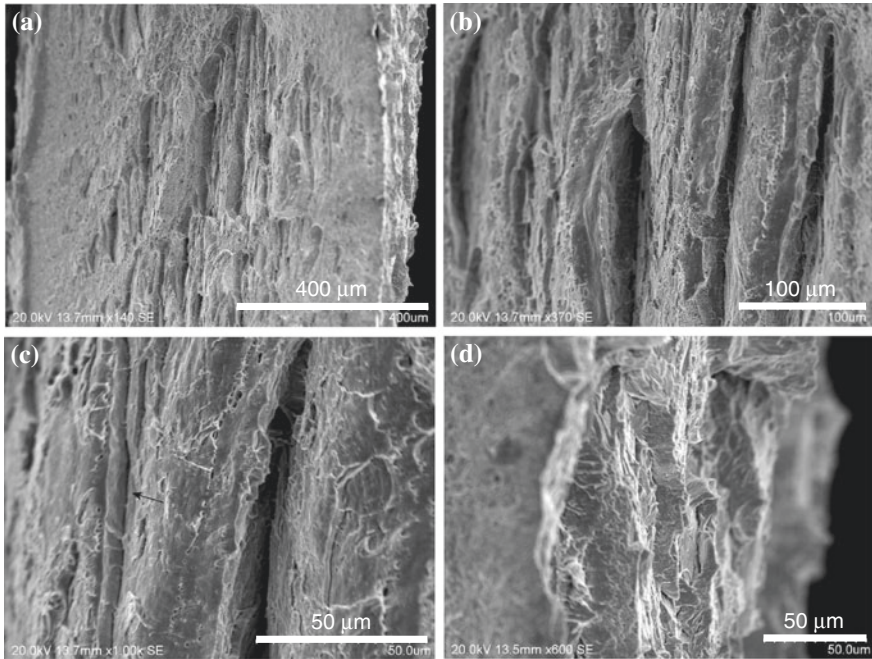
SEM fractographs showing the details of impact fracture surfaces of the steel tempered at 600 °C. a Delaminated fracture surface; b magnified; c magnified from (b) showing decohesion; d edge of the piece. Since the steps are not in the same plane, the area near the left and right edges of the images is faint. With kind permission from Springer Science + Business Media: Metallurgical and Materials Transactions A, Delamination fracture related to tempering in a high-strength low-alloy steel, 41, 2010, 159–171, Wei Yan, Wei Sha, Lin Zhu, Wei Wang, Yi-Yin Shan, Ke Yang, Fig. 12
